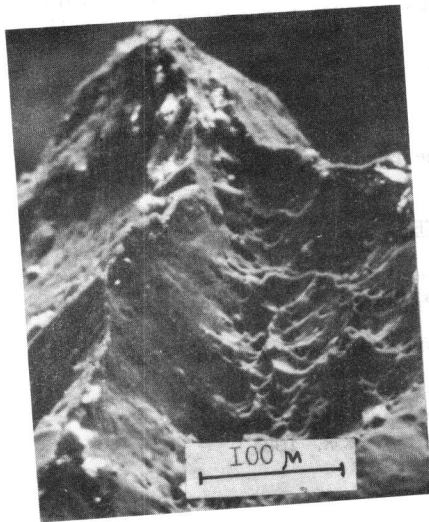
Fracture surface Al AD1 treated specimen
